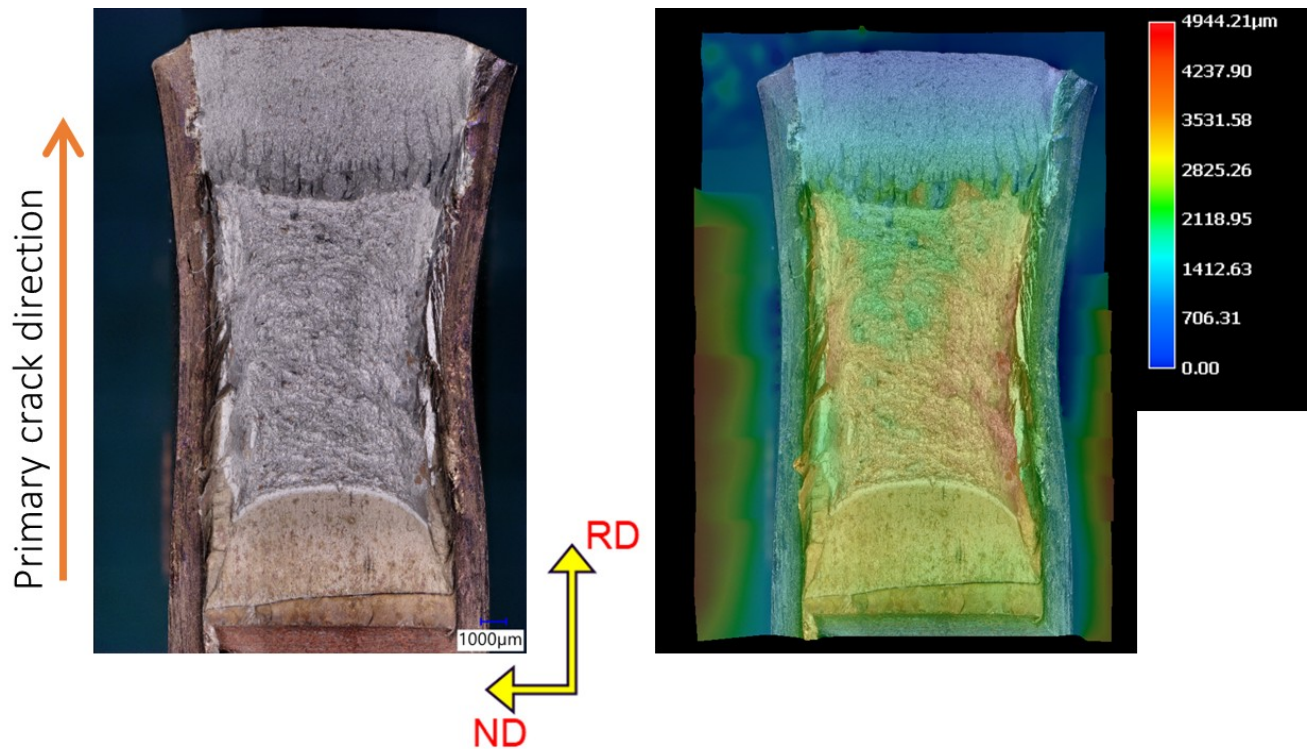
Stereo and depth field image (top view) of the Pipe X fracture surface
